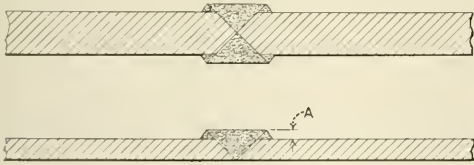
Cross Sections of Standard Welds Showing Single and Double Reinforcement
